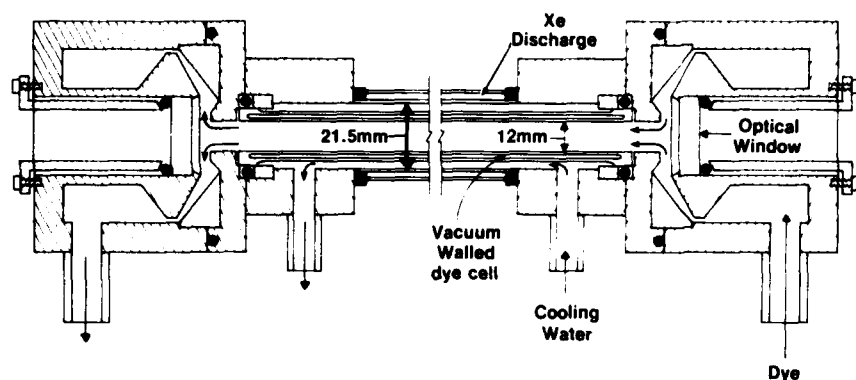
Flashlamp quadraxial arrangement showing the end cap design.
